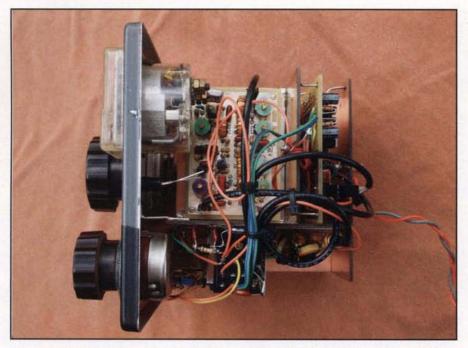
A look inside the 6-meter SSB transceiver. The internal chassis is made from soldered up PC board pieces.
